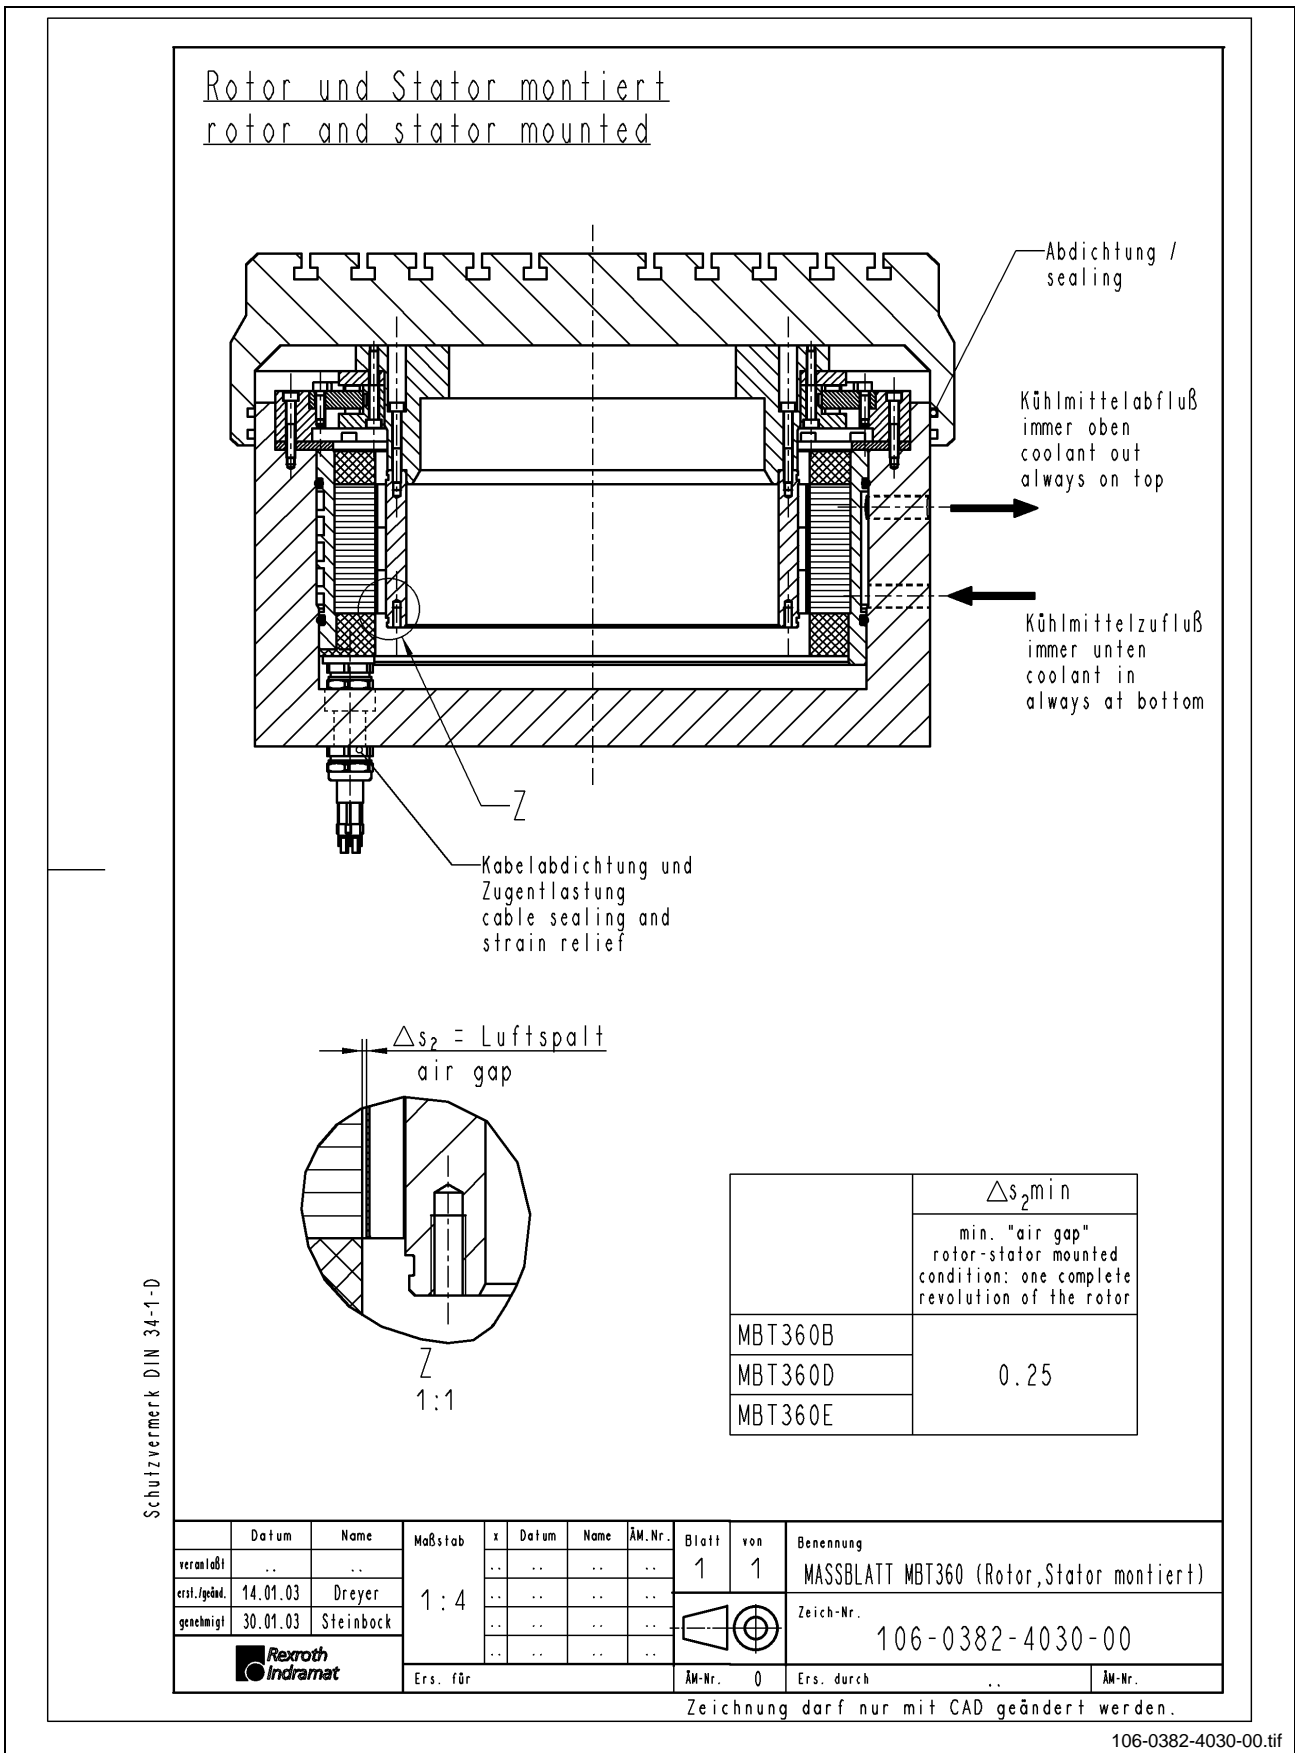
Dimension sheet size 360, Rotor and Stator, mounted
